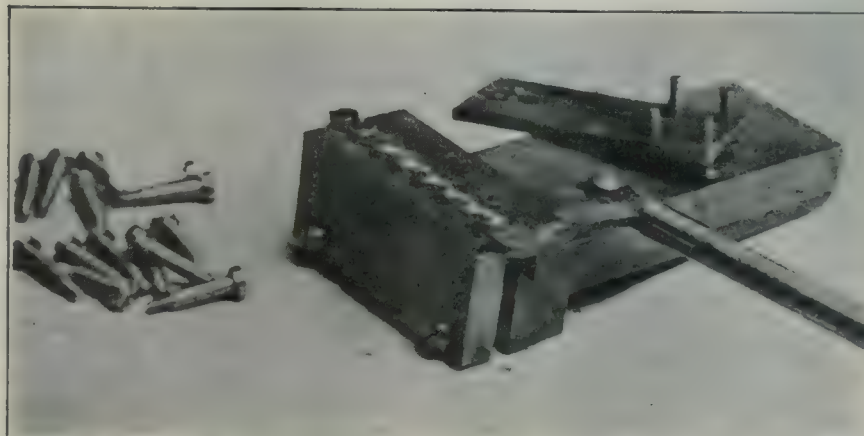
SCREW HEAD SLOTTING FIXTURE WITH TOP COVER REMOVED.
